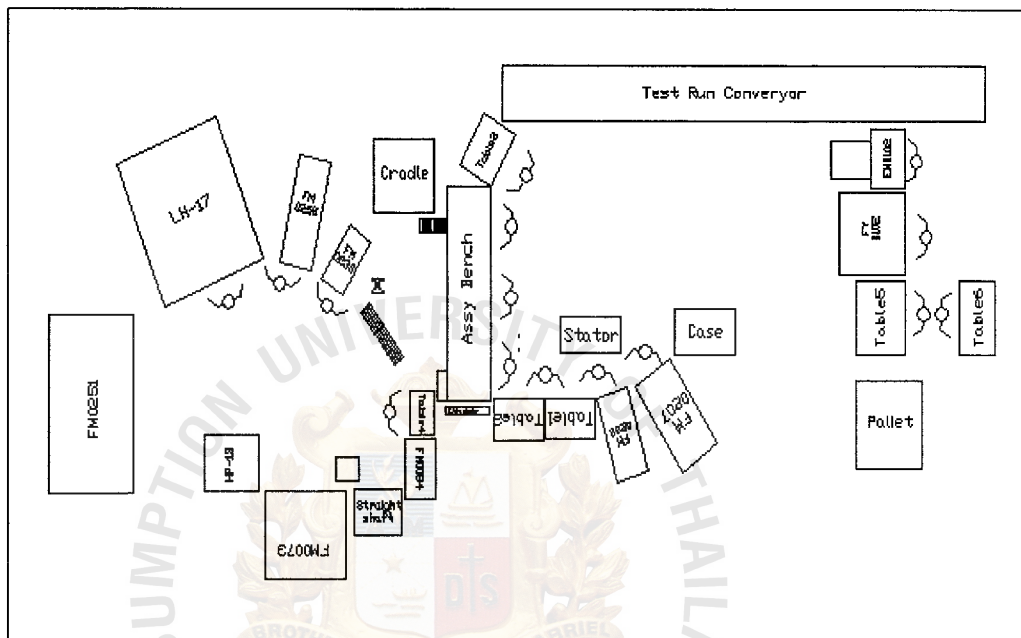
The Line Layout of Assembly Line after Line Integration.
